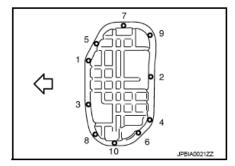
Identifying Oil Pan (Lower) Mounting Bolts With Tightening Sequence Courtesy of NISSAN NORTH AMERICA, INC.
